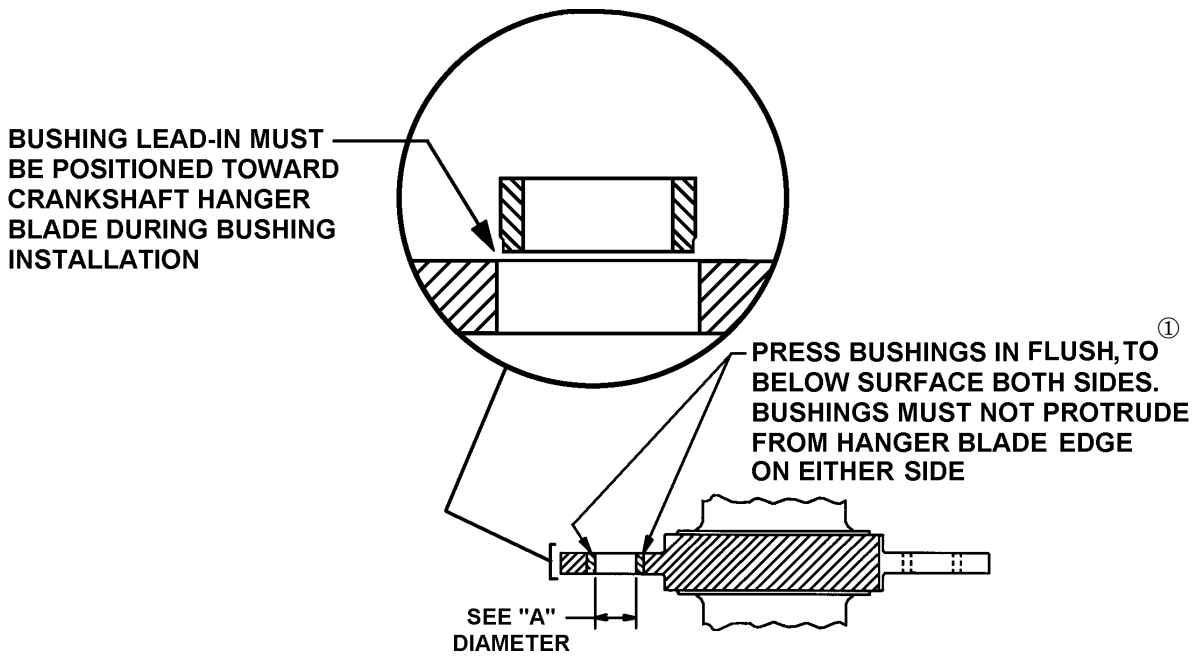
CRANKSHAFT HANGER BLADE BUSHING INSTALLATION
